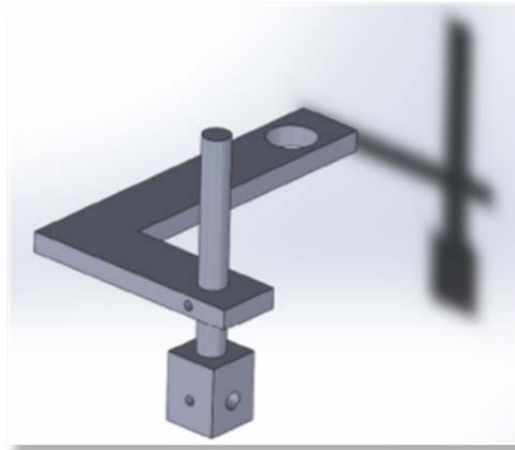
3-D rendering, produced using Solidworks, of the complete mounting bracket for the proximity probe, courtesy of D. Seivwright.
